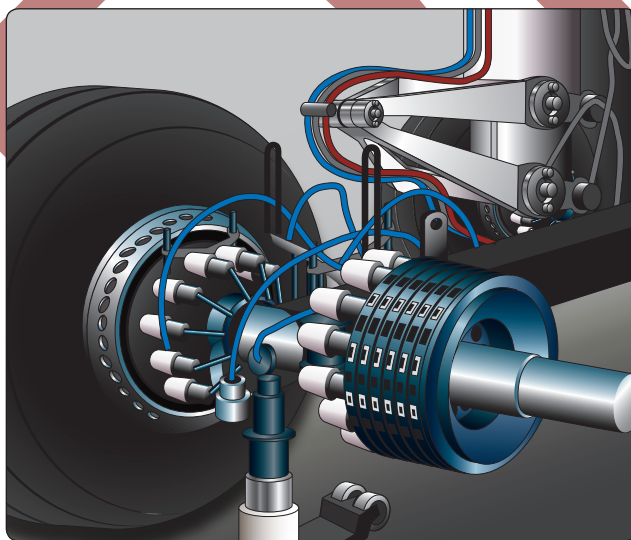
Many modern segmented rotor disc brakes use a housing machined to fit numerous individual actuating pistons.
